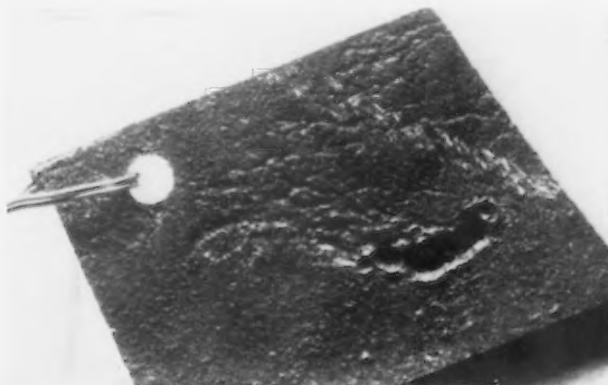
The green sand side of the casting shown in Fig. 15. Molten metal has eroded the green sand surface of the mold, due to agitation caused by the dry sand core.
